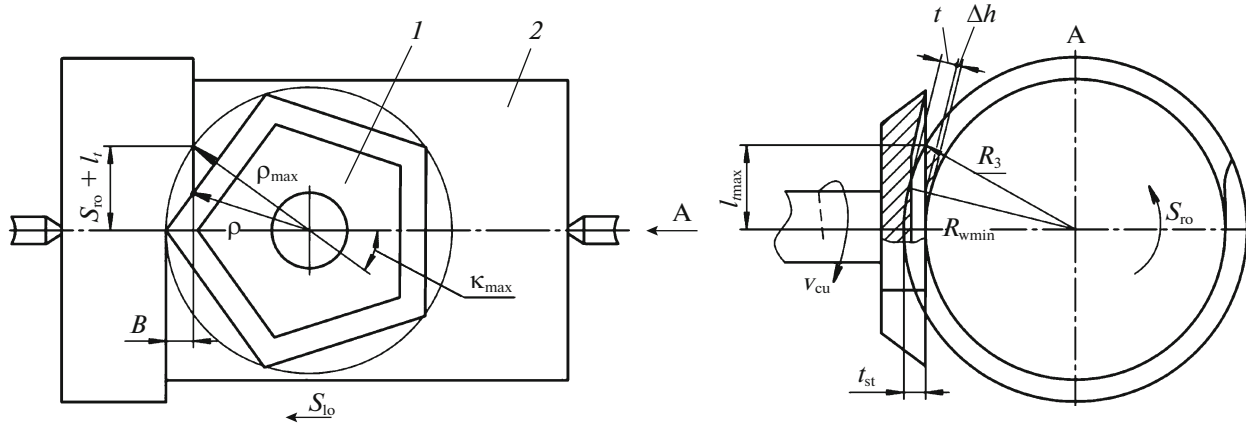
Rotary turning by multifaceted cutters: (1) tool; (2) workpiece.
